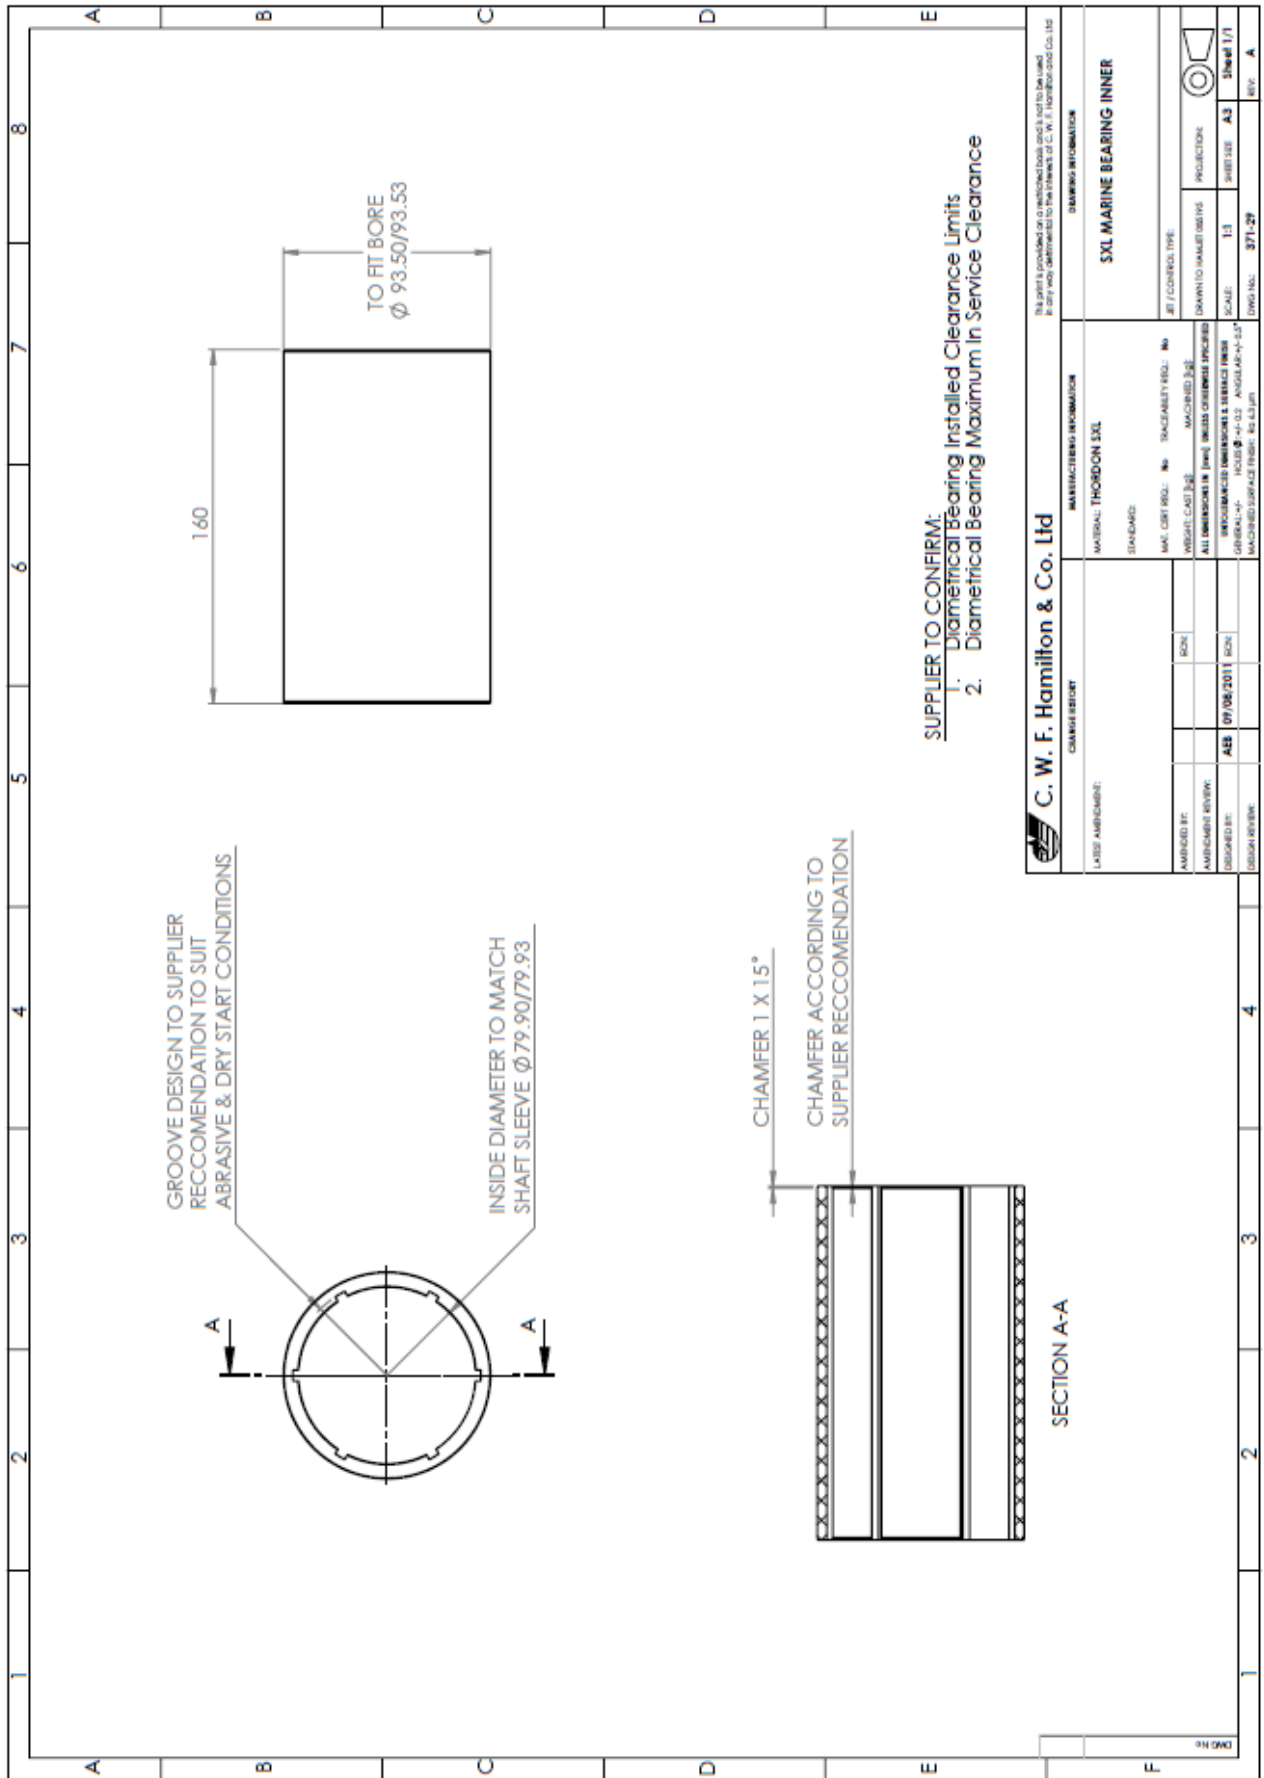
Alternative Marine Bearing Overview (Supplied to Manufacturer)
